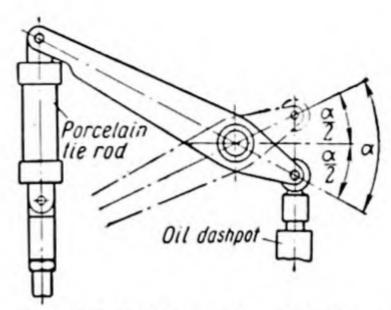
Position of middle lever when breaker is open (lever end bears on oil dashpot striker head)
